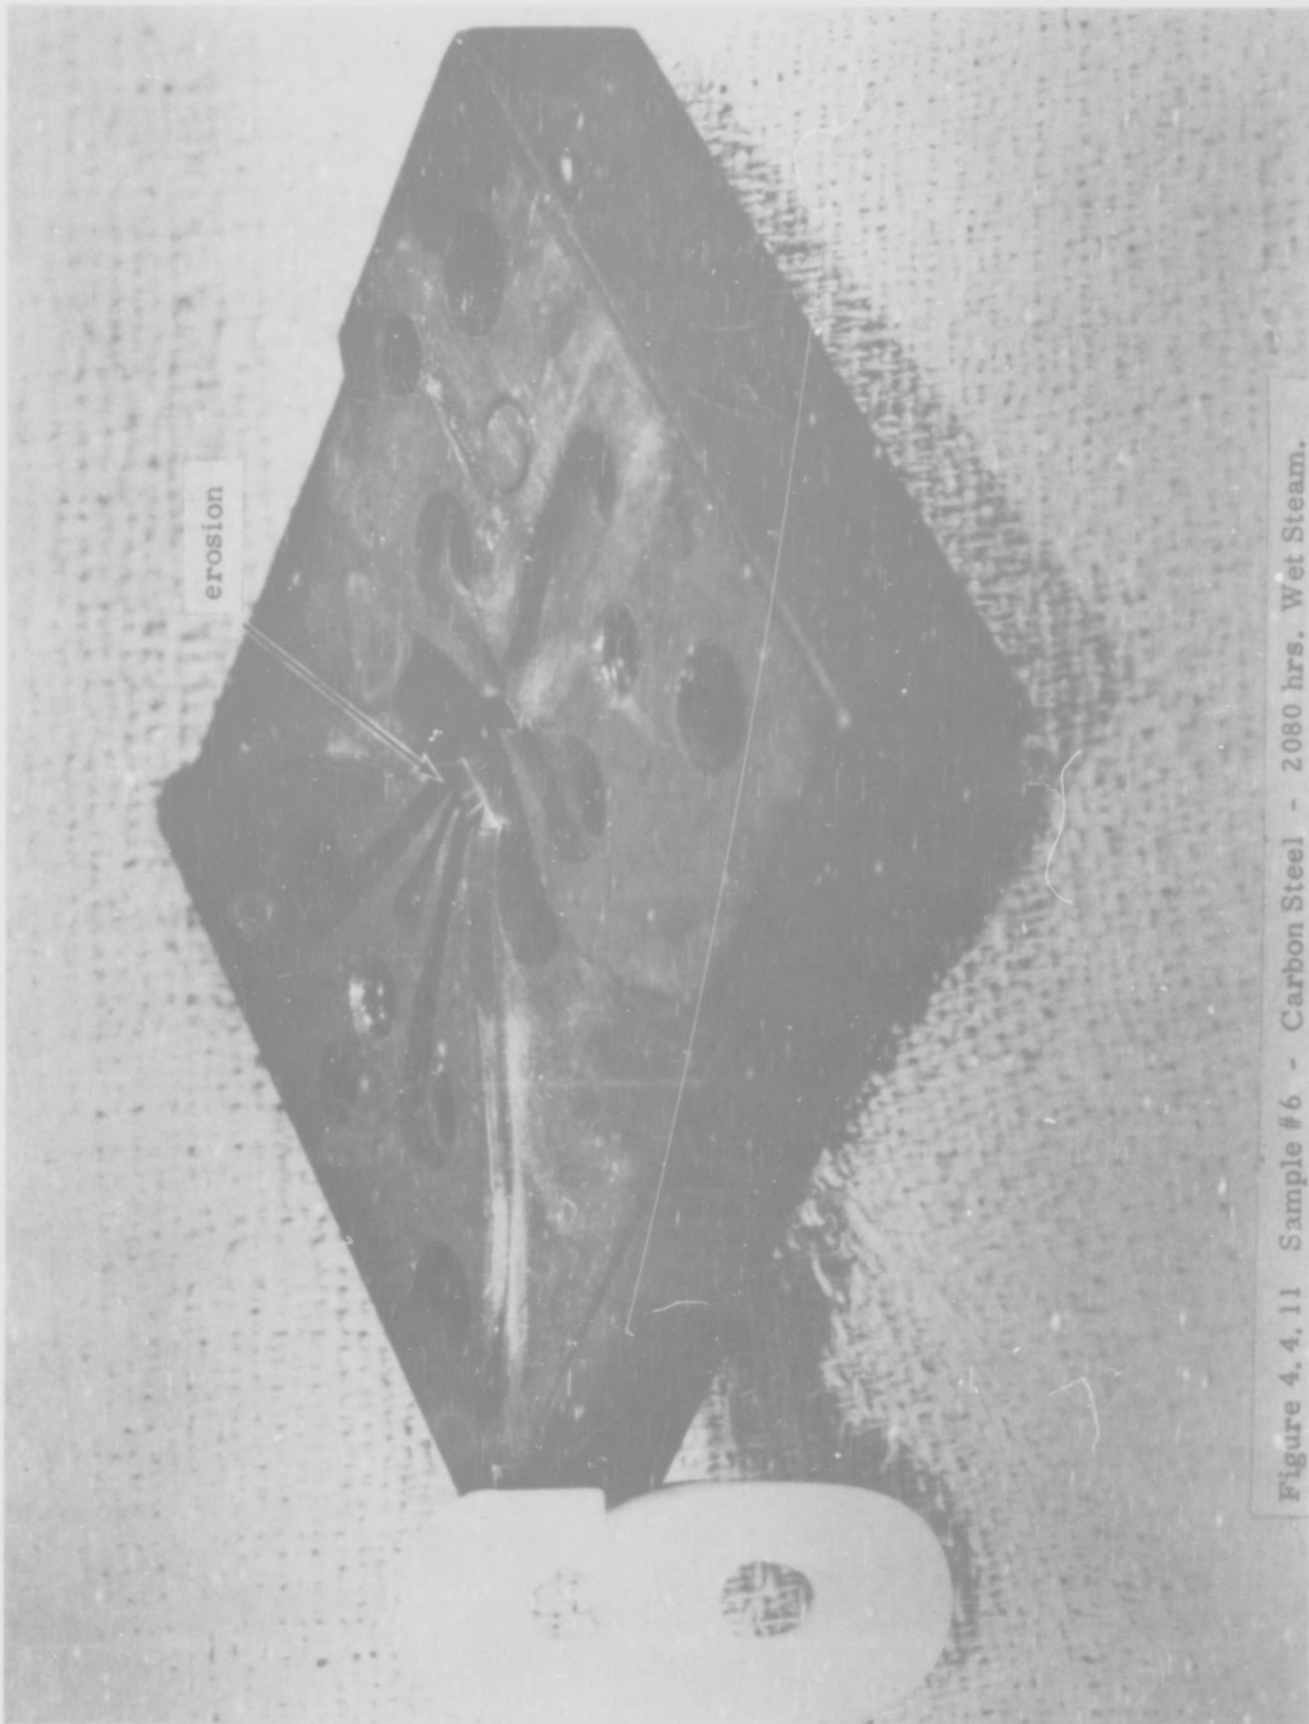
Sample #6 - Carbon Steel - 2080 hrs. Wet Steam.
